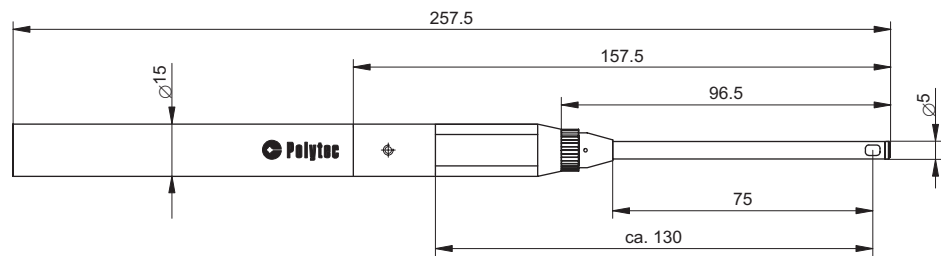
View of the side exit head OFV-C-102 (dimensions not specified are given in mm)
